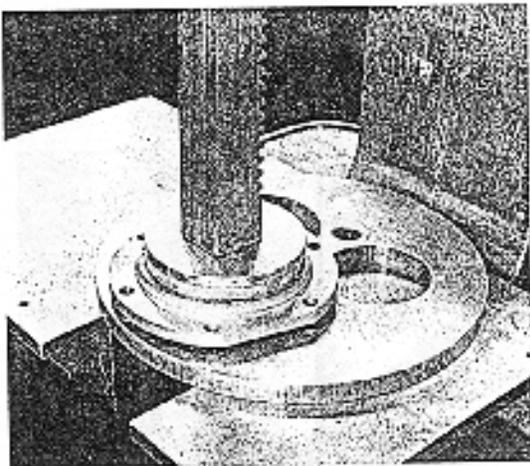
Pressing New Oil Seal in Bearing Cap Retainer.
